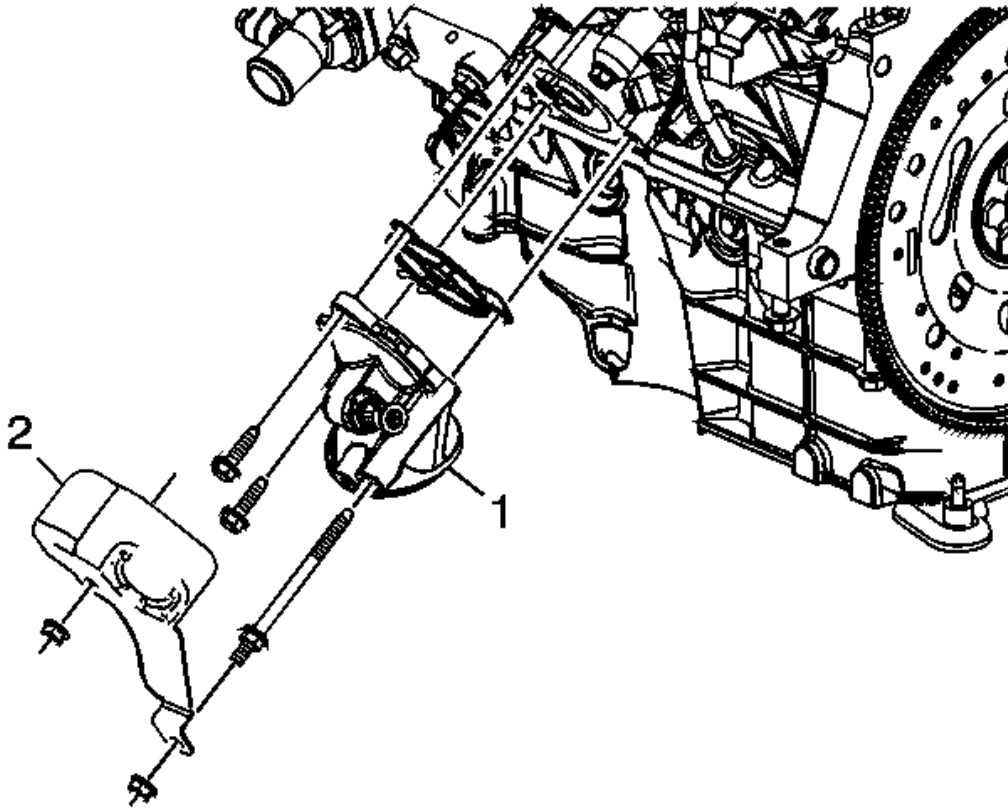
Identifying Oil Filter Adapter & Heat Shield
